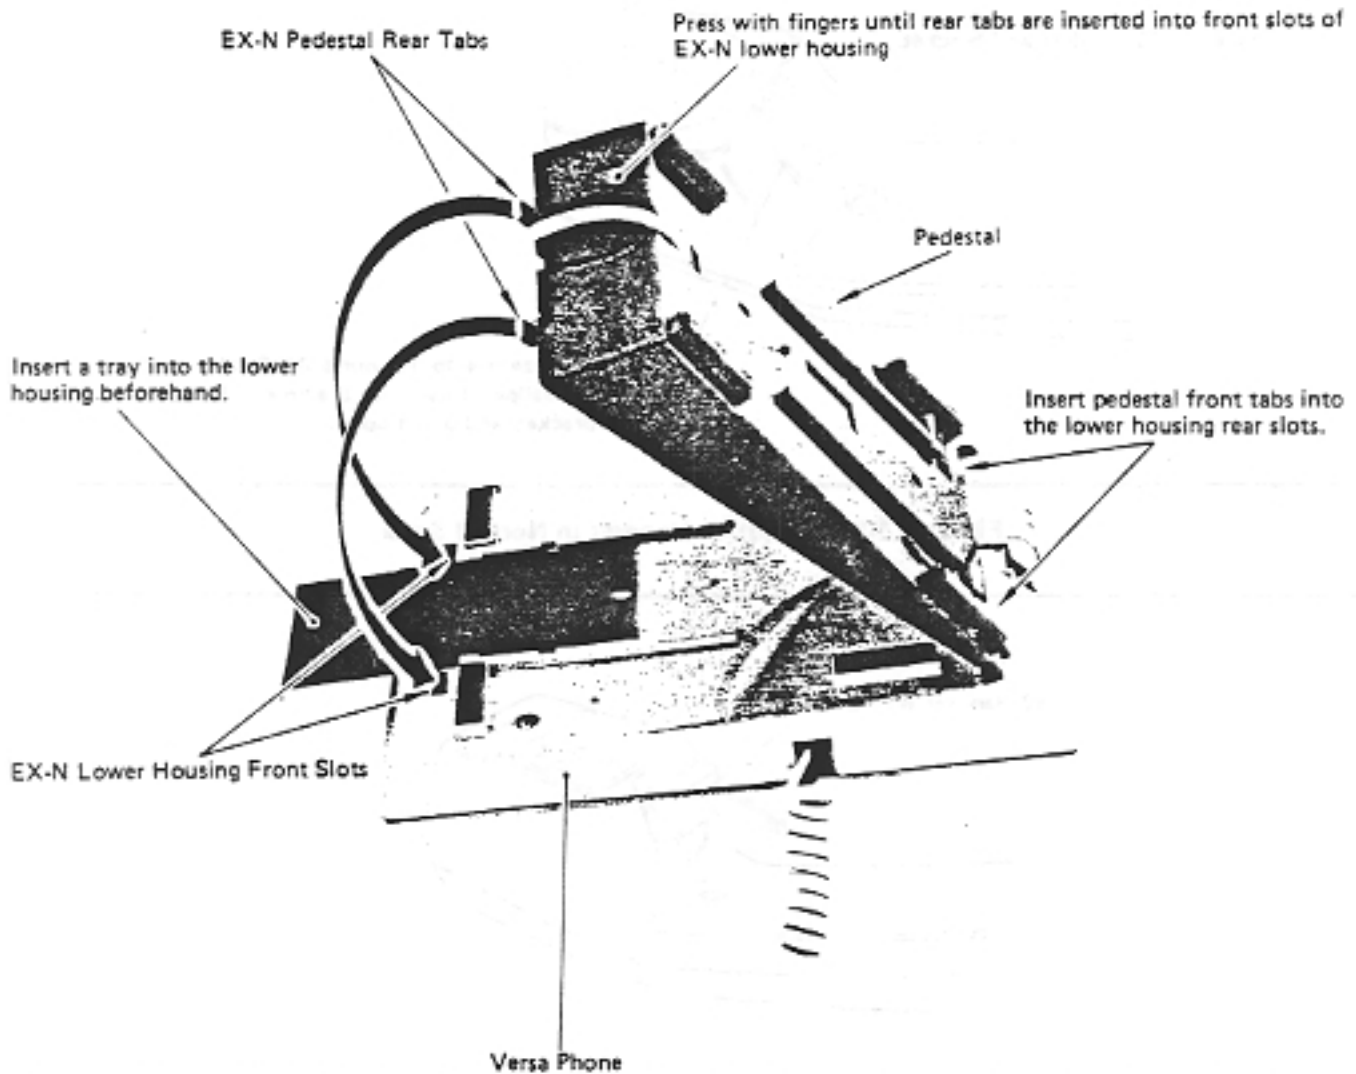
(4)(b) Mounting Pedestal on Lower Housing
